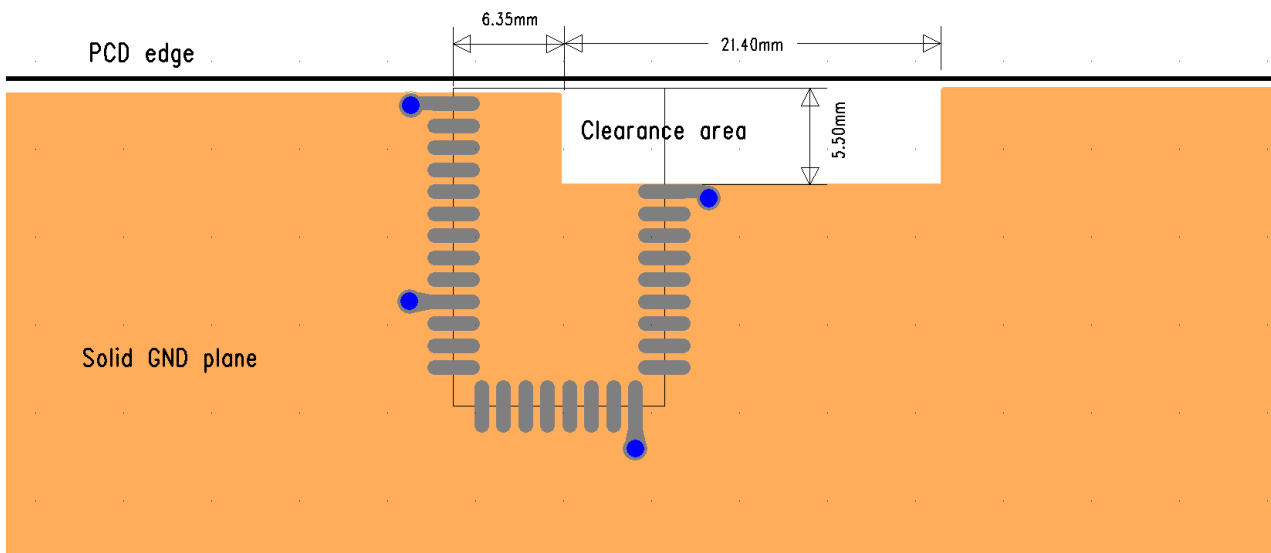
Example layout for BLE112-A with the module at the long edge of the PCB
